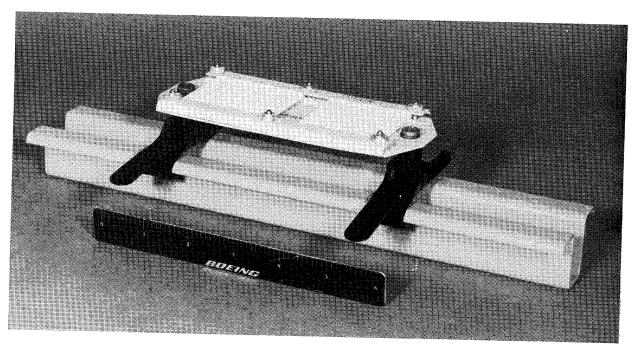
Interior Aircraft Shear and Flexure Specimen Fixture
